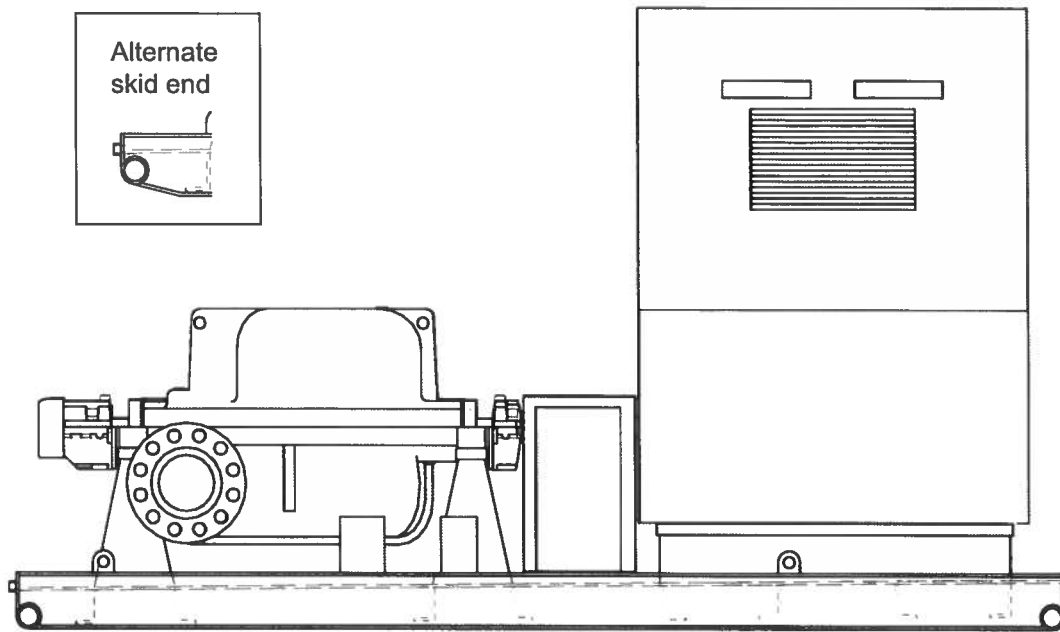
Oil pipeline skid type baseplate
